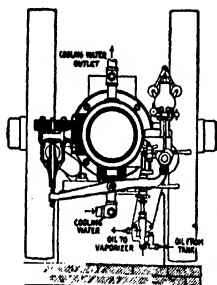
Cross Section of Hornsby-Akroyd Oil Engine
